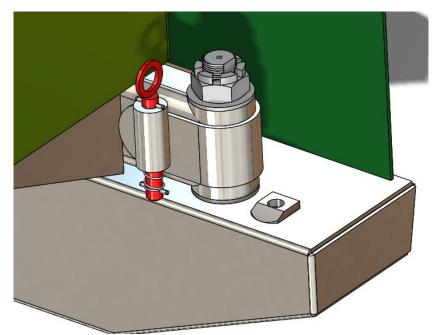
Spindle – Hub assembly with spring loaded latching in the open (tailgate access) position.
